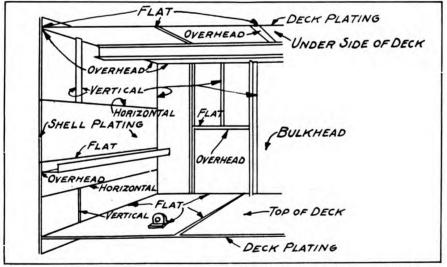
VARIOUS POSITIONS OF WELDS-FLAT, HORIZONTAL, VERTICAL AND OVERHEAD
